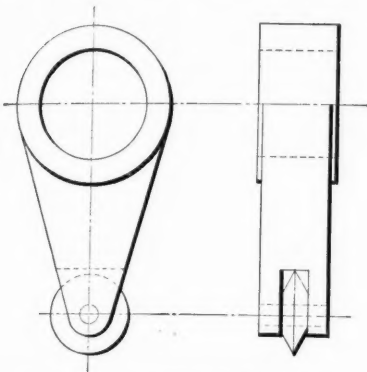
"Squeezing" Tool for Graduating in the Milling Machine.
